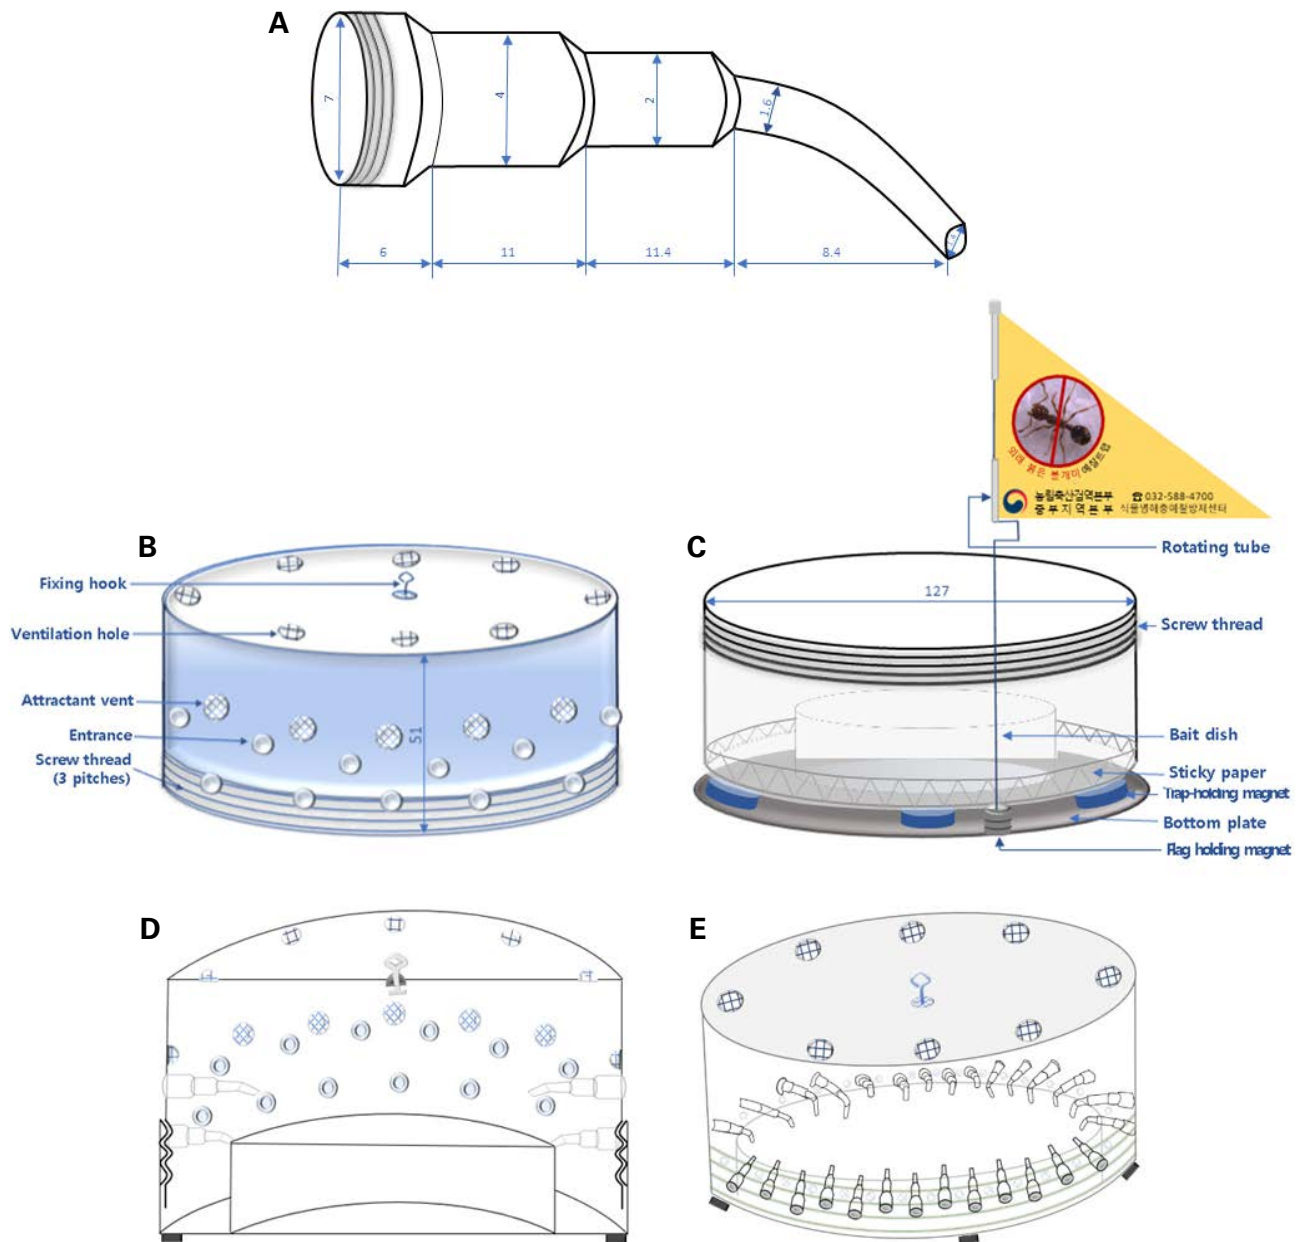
Assembly drawings of different parts and complete unit of the new trap. A: Multiple ant guiding nozzle; B: Exterior of the upper part; C: Exterior of the lower part; D: Longitudinal section the complete unit; E: Projection drawing of the upper part.
